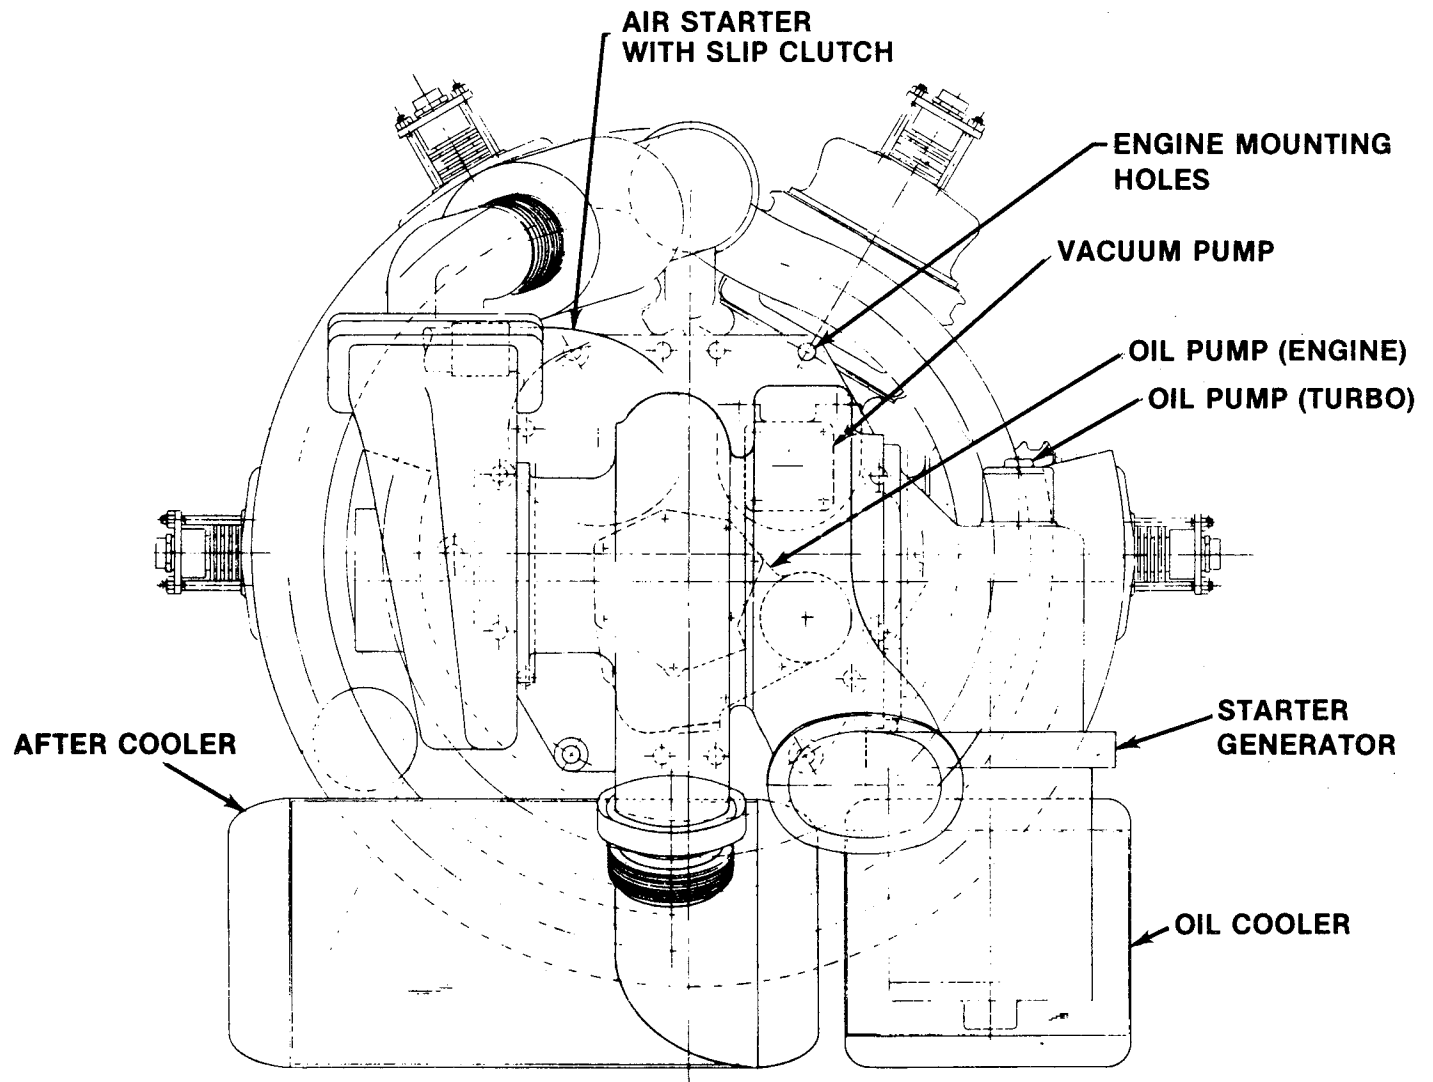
298kW AIRCRAFT DIESEL—REAR VIEW
